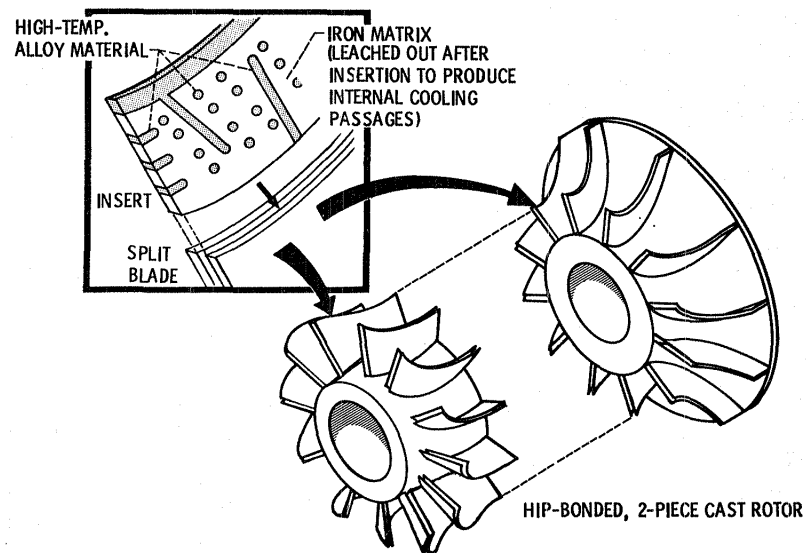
Fabrication of cooled radial-inflow turbine rotor.
